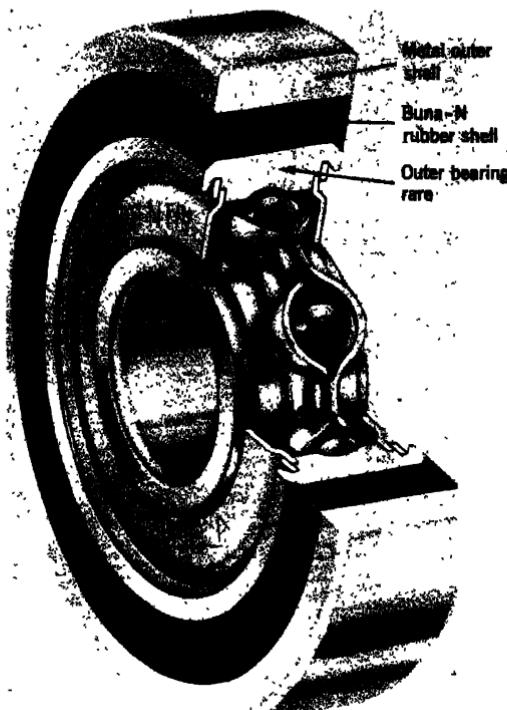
Quiet bearing construction. (Courtesy of Fafnir Bearing Company.)
